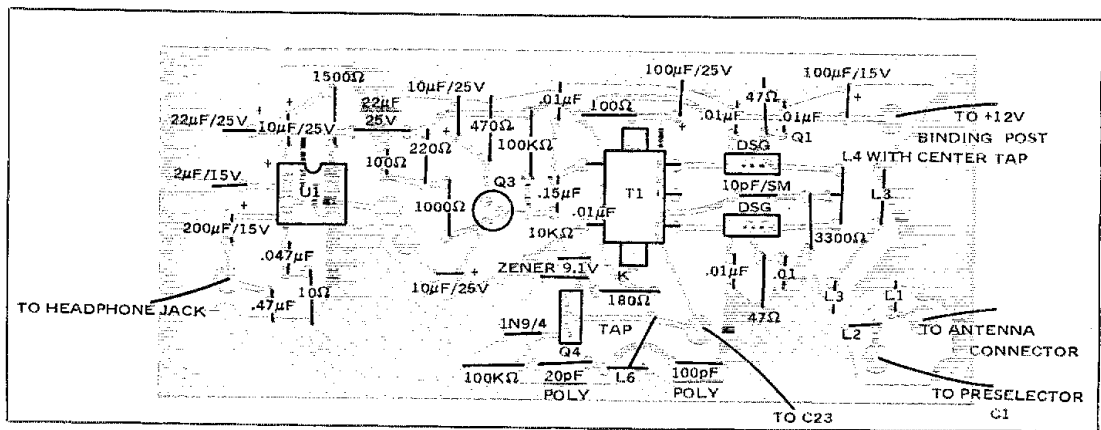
Shown here is the foil side of the circuit board with parts layout. Grey areas represent unetched copper. Drawing is to scale.
